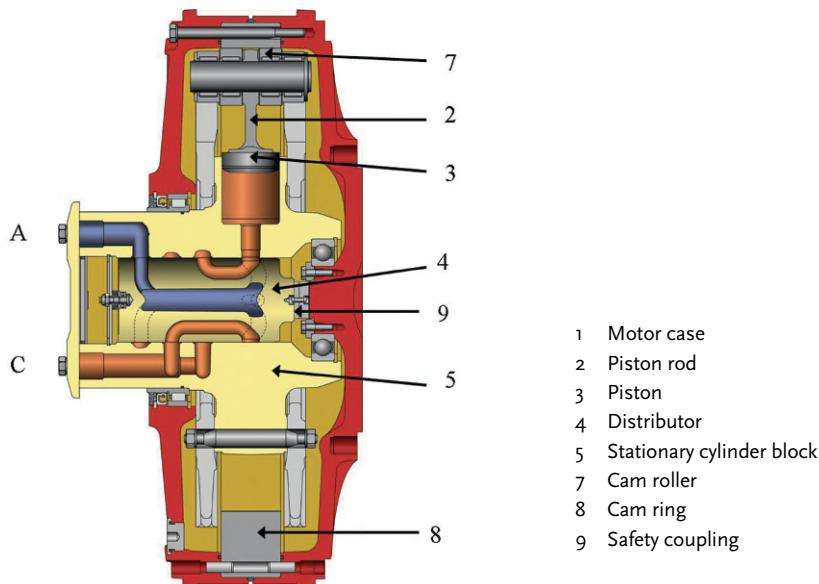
D Section view of a radial piston motor (Courtesy of Hägglunds)
